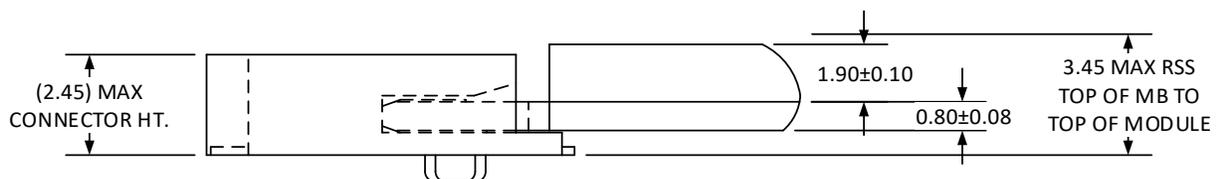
H2.5-S5- Stack-up Top Mount Single-sided Add-in Card for 2.00 Maximum Top-side Component Height and with Higher Clearance above Motherboard
